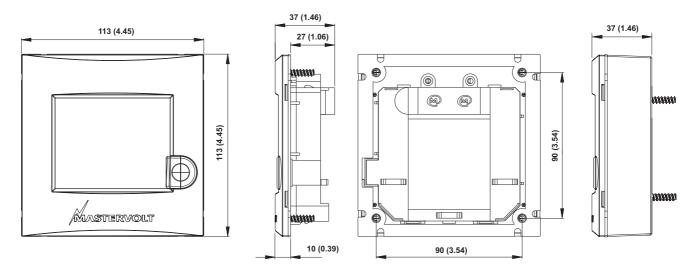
Dimensions of the panel without and with outer casing. All dimensions are in mm (inch)
